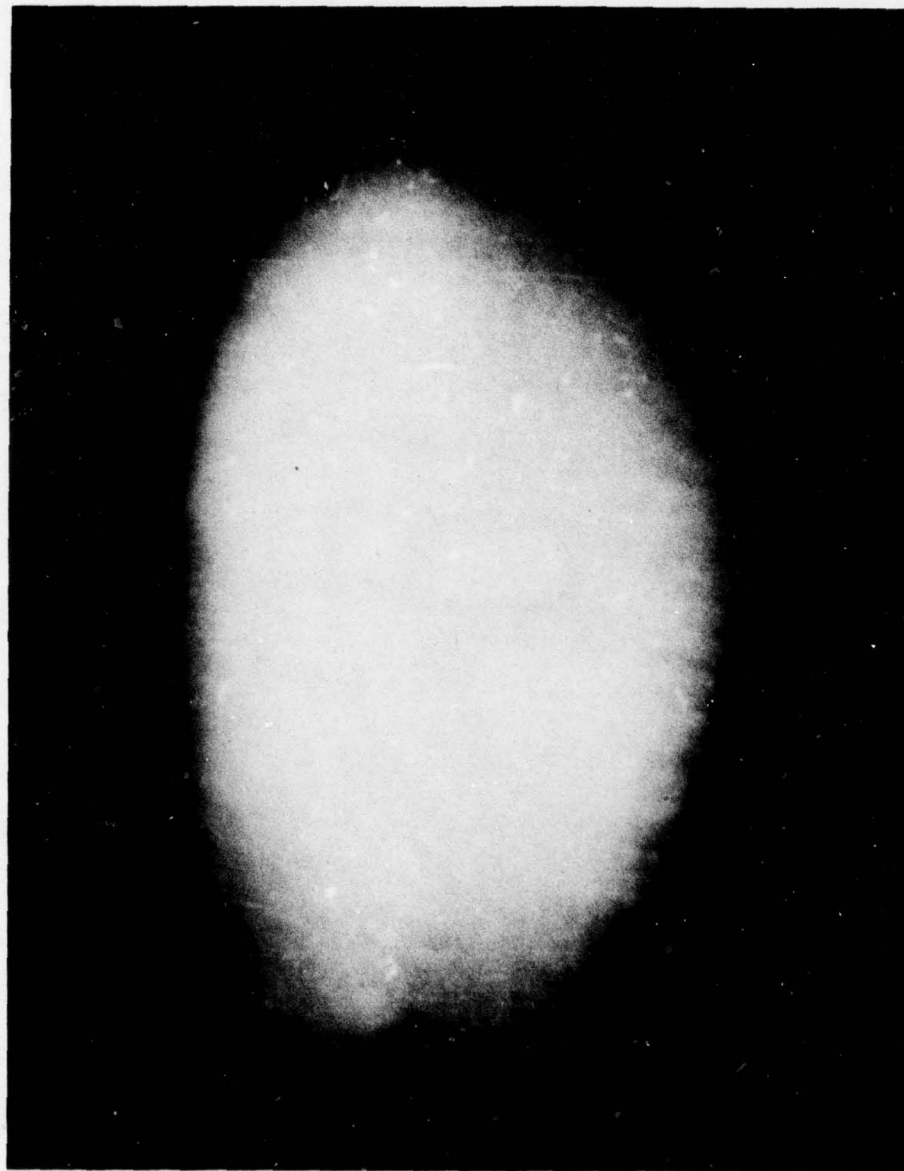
Image from Visor Blank Molded on Rough Mold
